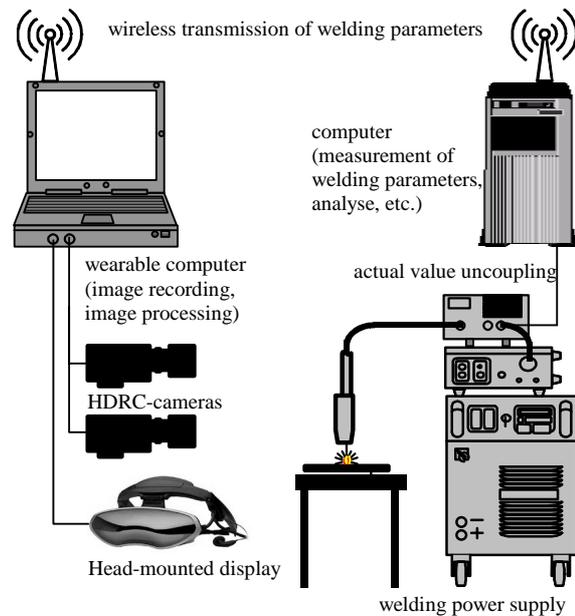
Principle sketch of the system, depicted without the welding helmet
